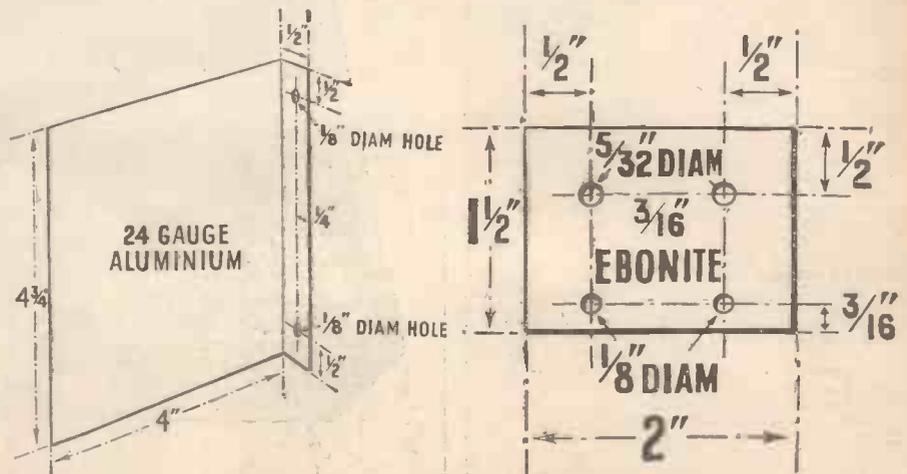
This screen, which is screwed to the panel, is mounted between the aerial and anode coils in the position shown in Fig. 5.
